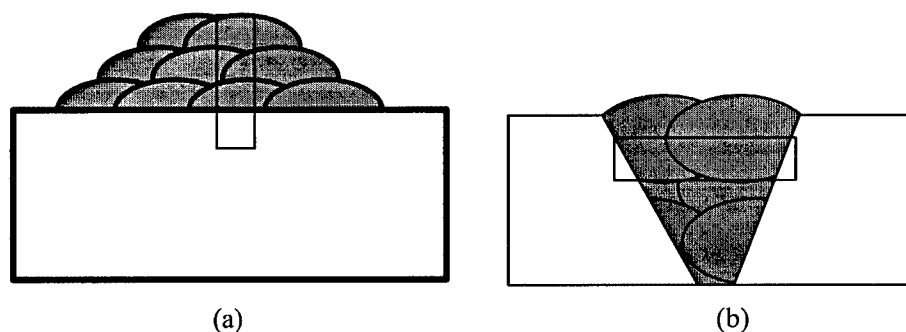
Representative illustration of the locations where photomicrographs were taken in (a) bead-on-bead welds, and (b) multiple-pass V-groove welds.
